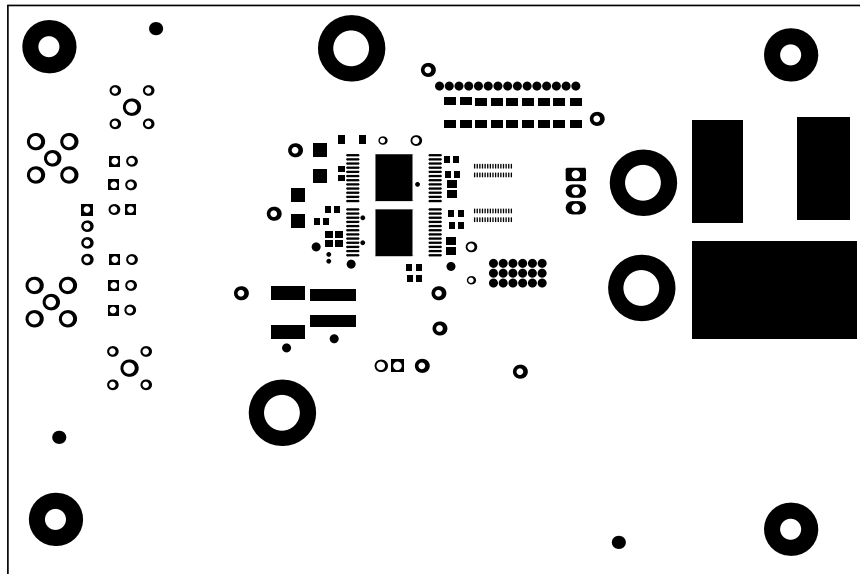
Top Solder Mask (TPS7H6013EVM-CVAL)
